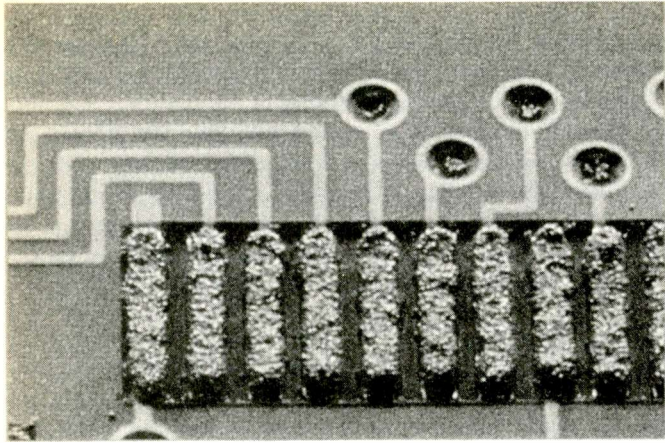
Solder paste in place: the photograph clearly shows its grainy texture.
